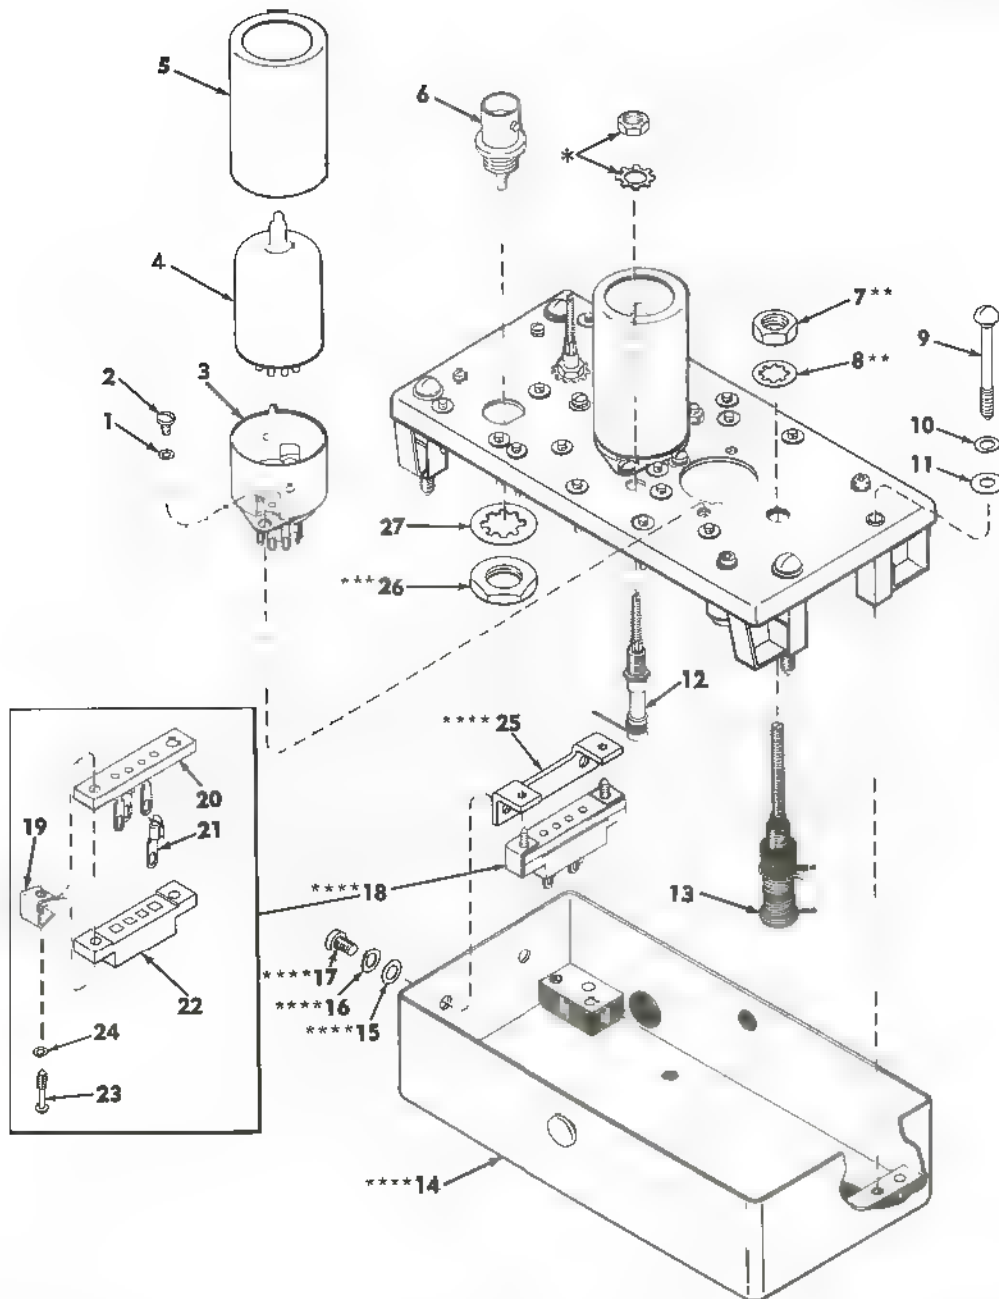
FILTER ASSEMBLY /9142934 AND 9142936/-EXPLODED VIEW
